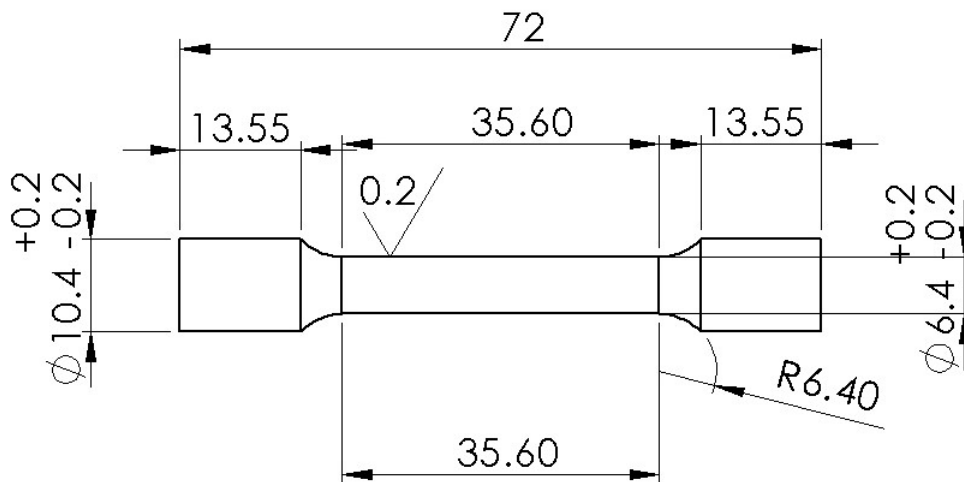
Tensile test specimen ASTM E8 (dimensions in mm).
